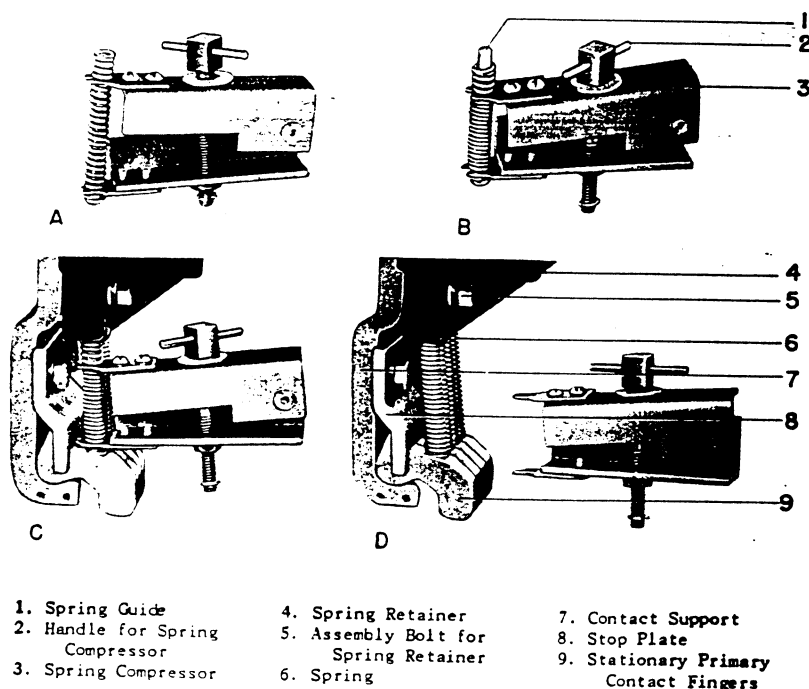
Method of Installing Primary Contact Springs Using a Spring Compressor
